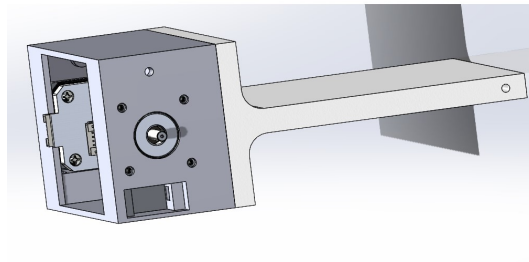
Assembly of the Hybrid Robot's motor section. The square hole is for the MG90s servo. Doing an Assembly like this, can catch errors before production.
